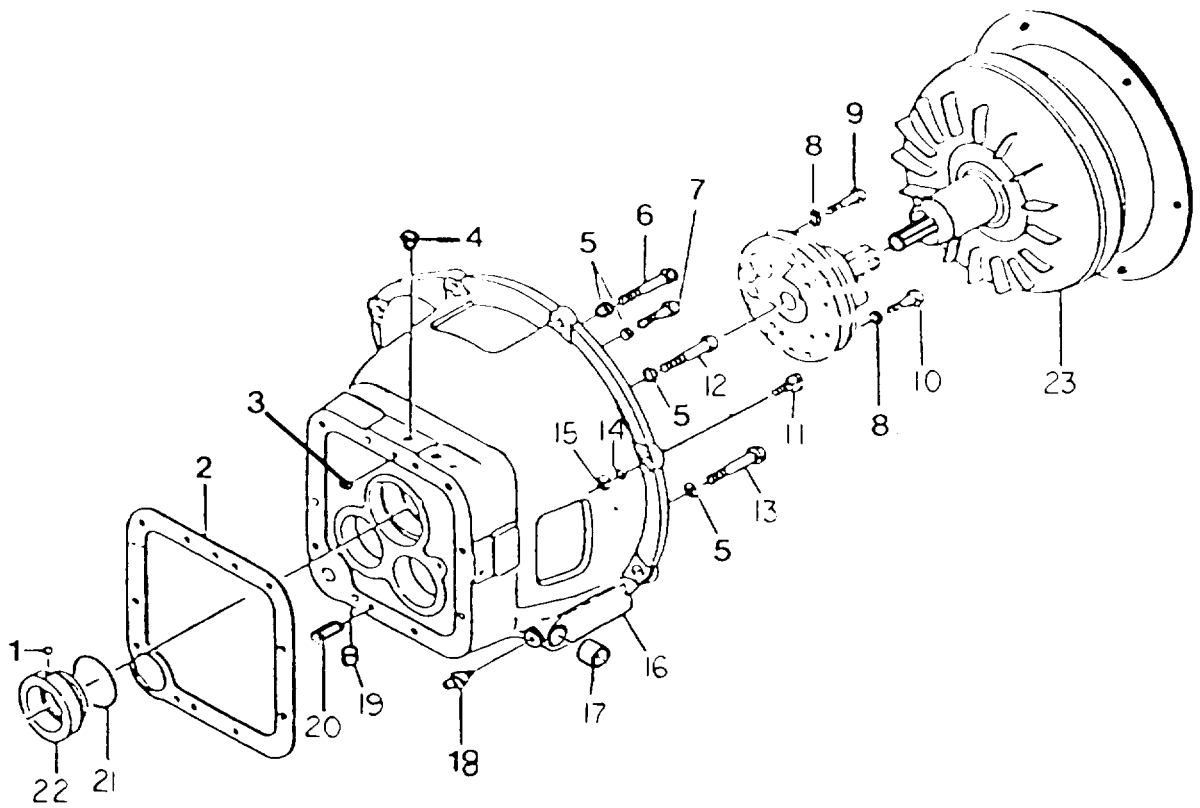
TORQUE CONVERTER, BELL HOUSING
